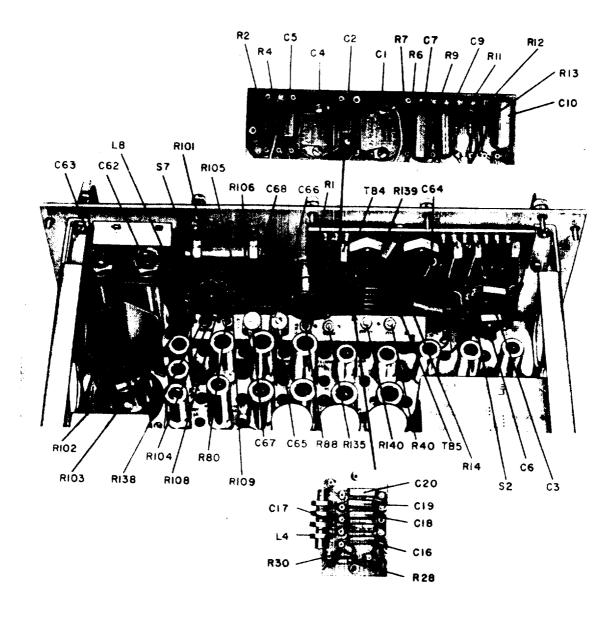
A. Front Panel, Inside Above Chassis TS-592B/UPM-15 and SG-343/UPM-15A
